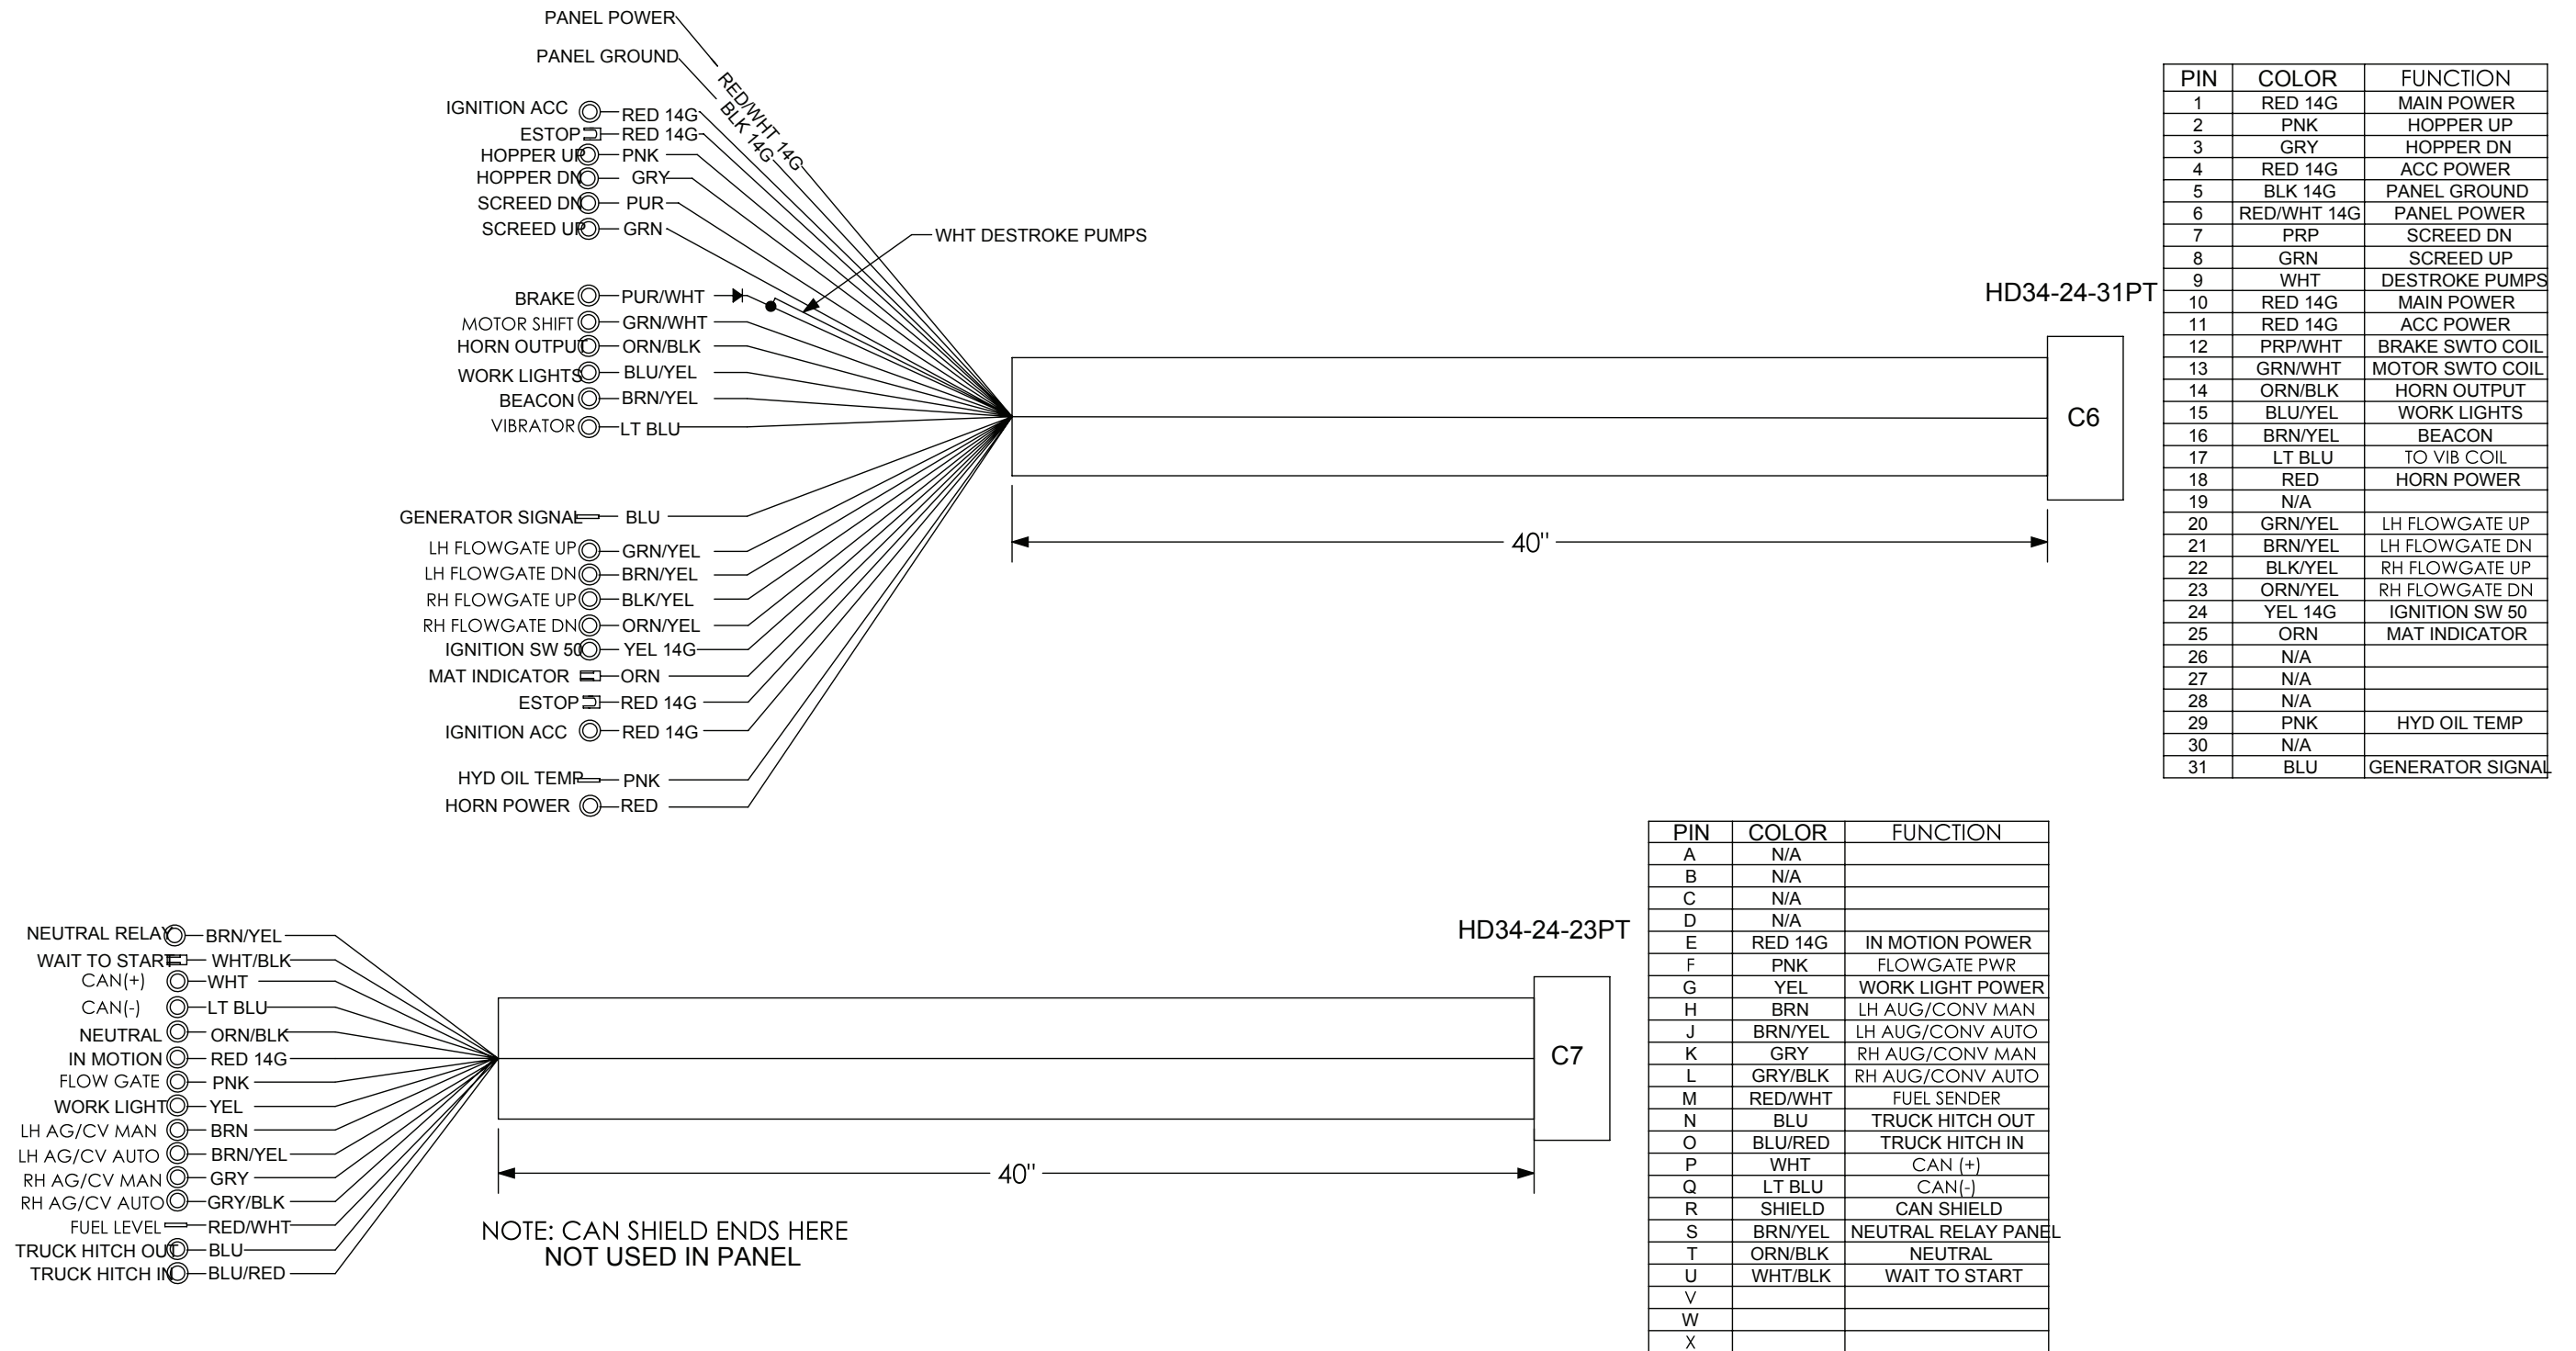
Control Panel Assembly Tier 4i (1 of 2)
